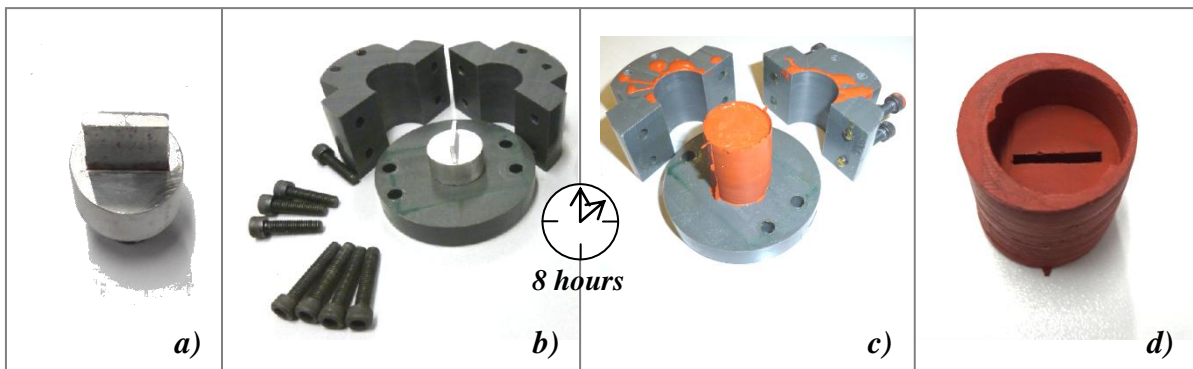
Metal cast and rubber mould for BE insertion in plastic casings
